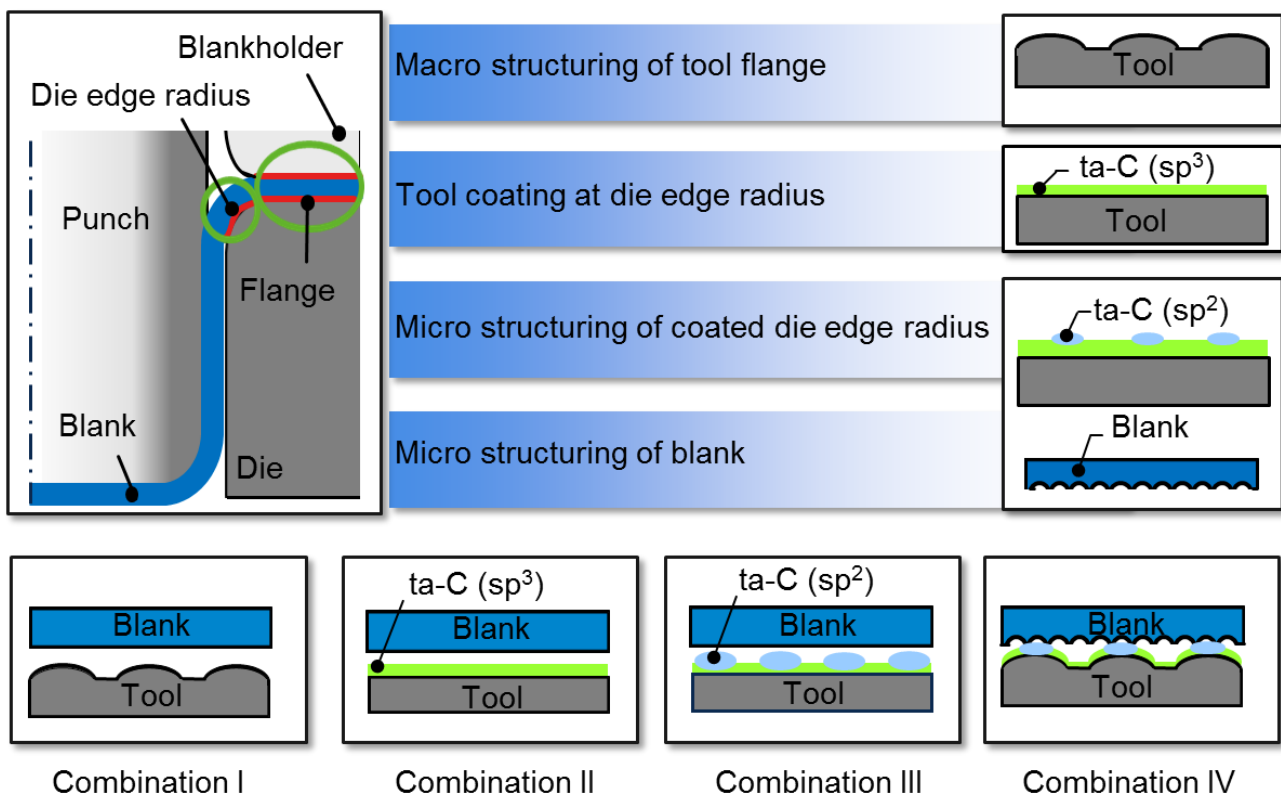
Schematic representation of concept for lubricant-free deep drawing process: macro structures in the tool flange area demands an alternating bending of the blank in the drawing process; a protective tool-coating (ta-C) at the die edge radius reduces the friction coefficient and a subsequent micro structuring with Direct Laser Interference Patterning (DLIP) reducing the contact area; micro-structuring of the semi-finished products with a high-throughput DLIP concept.
